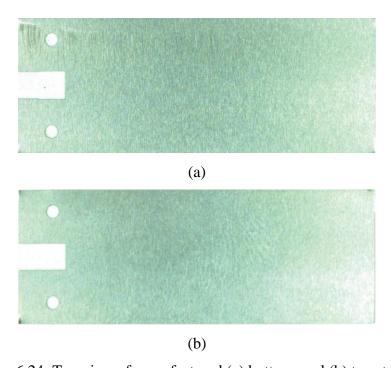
Top view of manufactured (a) bottom, and (b) top stencils
